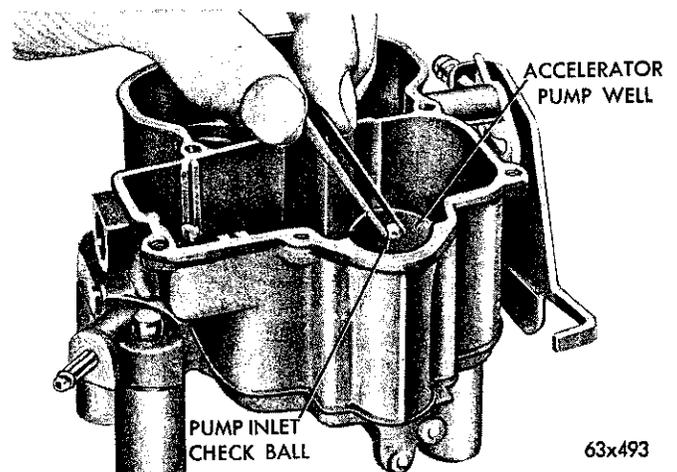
Installing Accelerator Pump Inlet Check Ball
